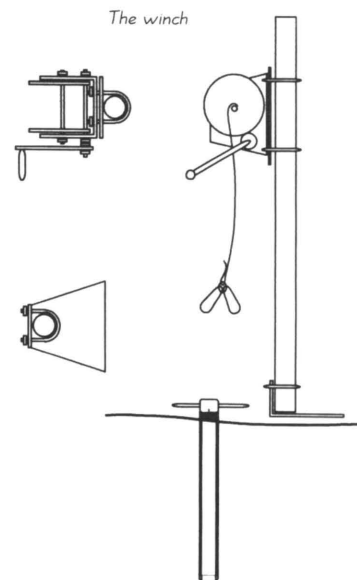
A small winch attached to an aluminium tube is used to pull the sampler free of the soil. The winch, standard equipment used on boat trailers, has 1:4.1 gearing giving 550 kp traction.
